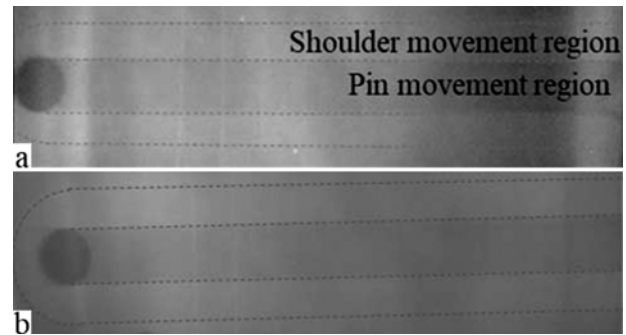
Radiography of (a) weld 8 and (b) weld 16.
